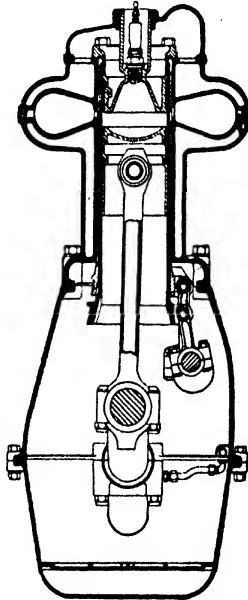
Transverse Section through Moline-Knight Sleeve-Valve Motor
